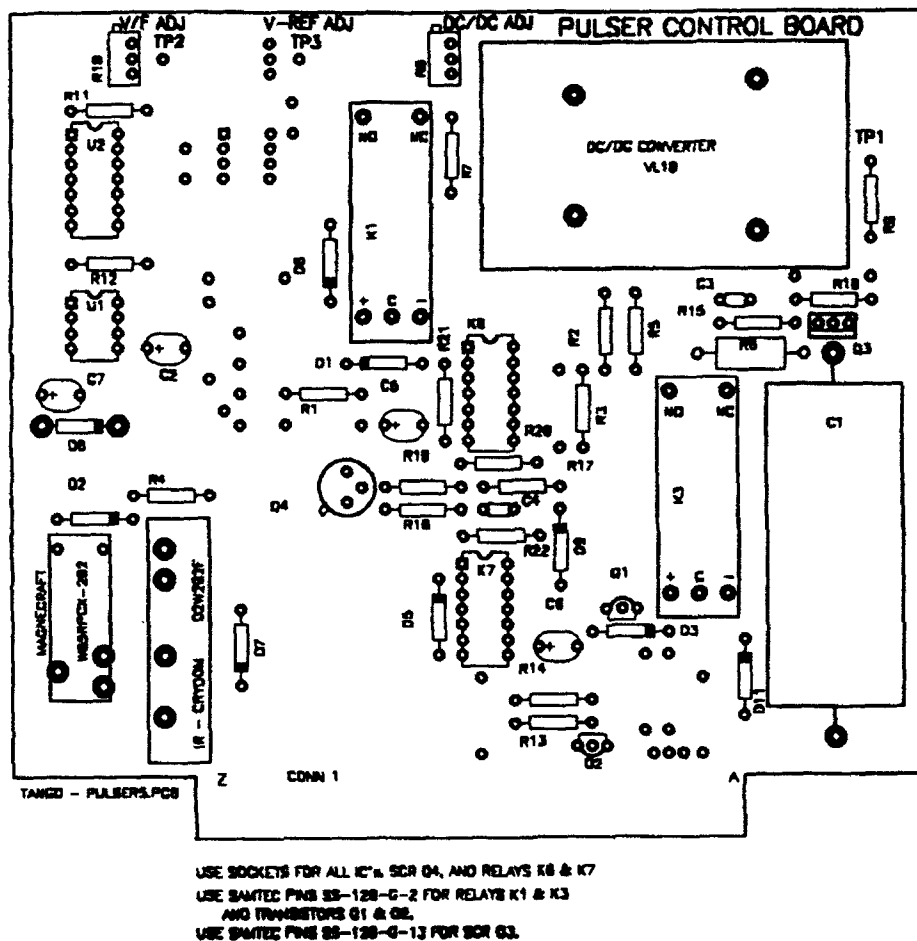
5-kV PULSER CONTROL BOARD COMPONENT LAYOUT
